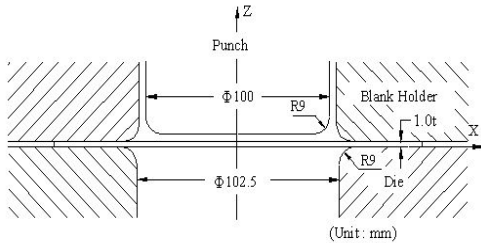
Geometric description of tooling for deep drawing of a cylindrical cup
